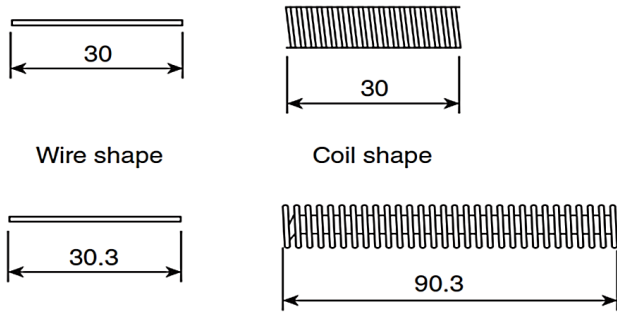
SMAs comparison stroke between coil shape and wire shape [13].
